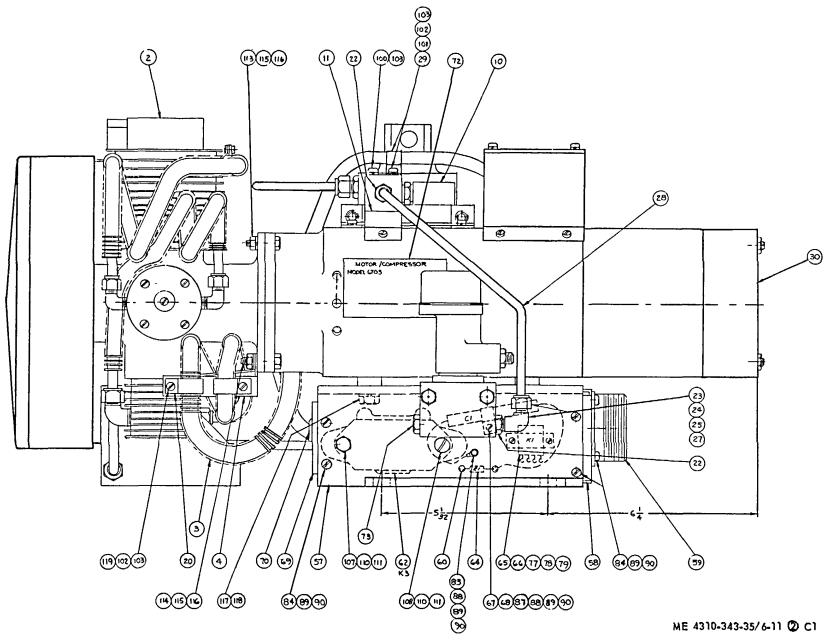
Motor-compressor assembly. Bogue Electric model 6703) (sheet 2 of 5)
